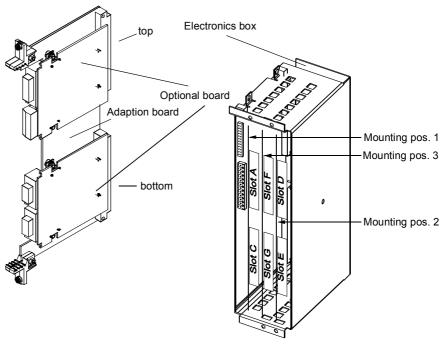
Adaptation board with optional boards and position of the slots for Compact units and chassis-type units
